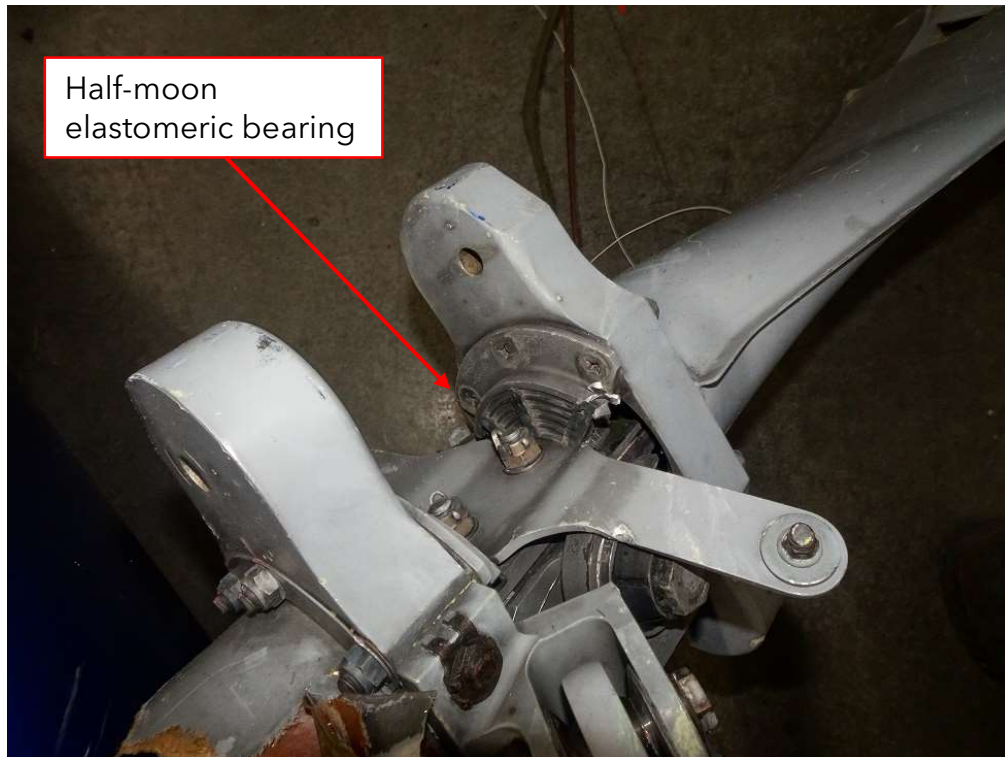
One of the four tail rotor half-moon elastomeric bearings.
